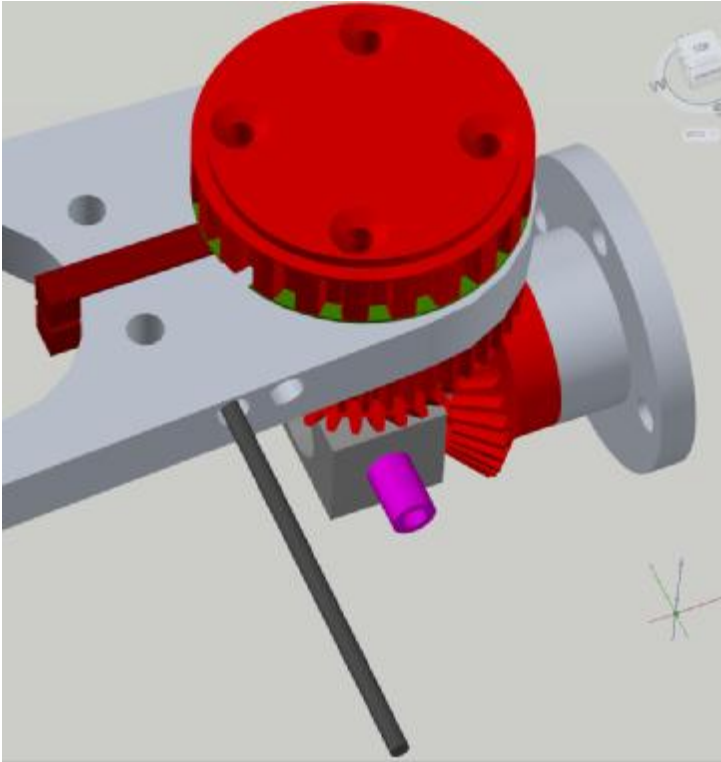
L-hand sensor showing alignment with the cut-out in the flange.
